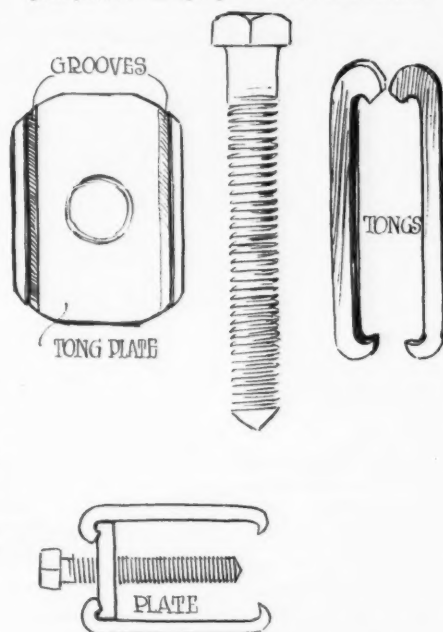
A simple timing gear puller made of old parts found around the shop. The plate is a piece of steel grooved as shown to receive the ends of tongs. The other ends of the tongs are curved to grip the gear. The puller is adjustable because the plate may be moved to any point on the bolt
